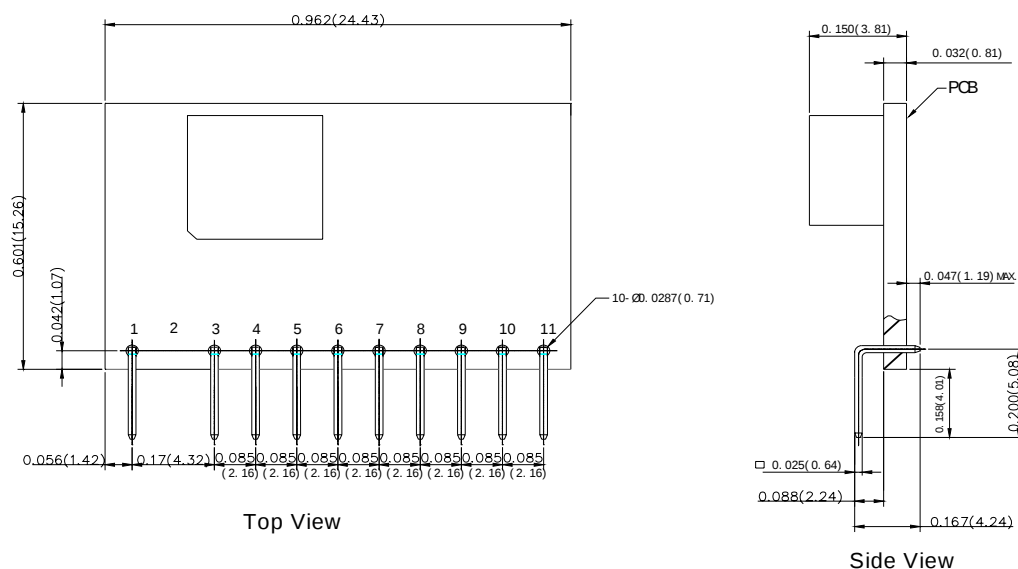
88MG876-D Mechanical Dimensions (DIP Package)
